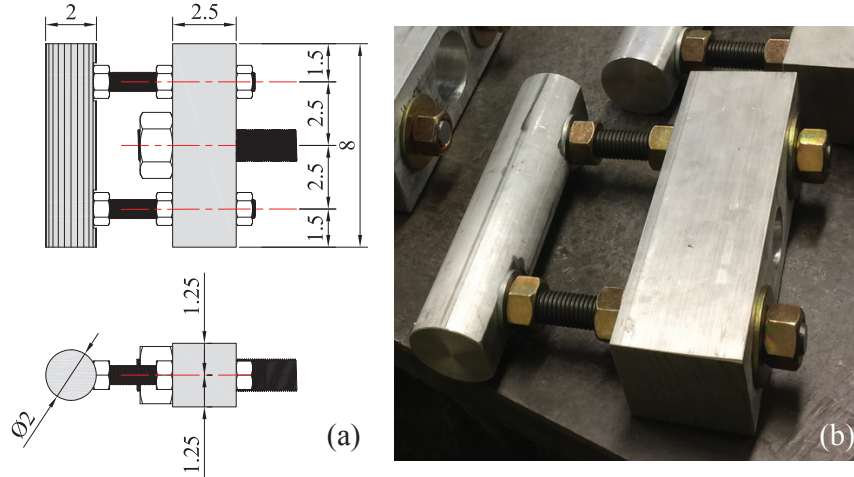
Design of loading grips for SMA Ring specimen: (a) top and side view and (b) photo of the loading grip (units: inch).
